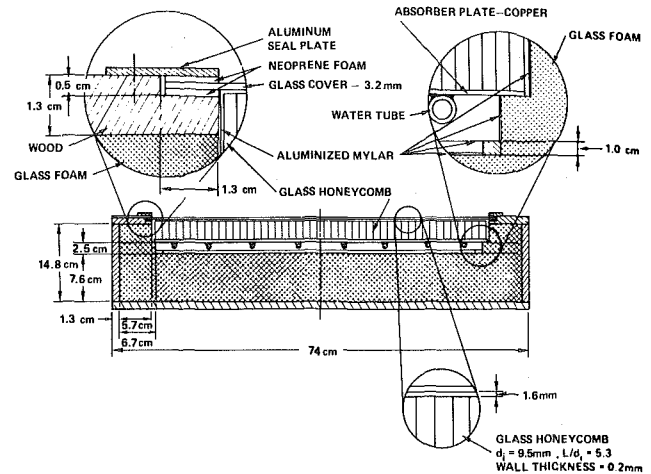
Glass honeycomb solar collector, cross-sectional view
